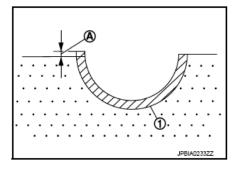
Identifying Main Bearing Crush Height Courtesy of NISSAN NORTH AMERICA, INC.
